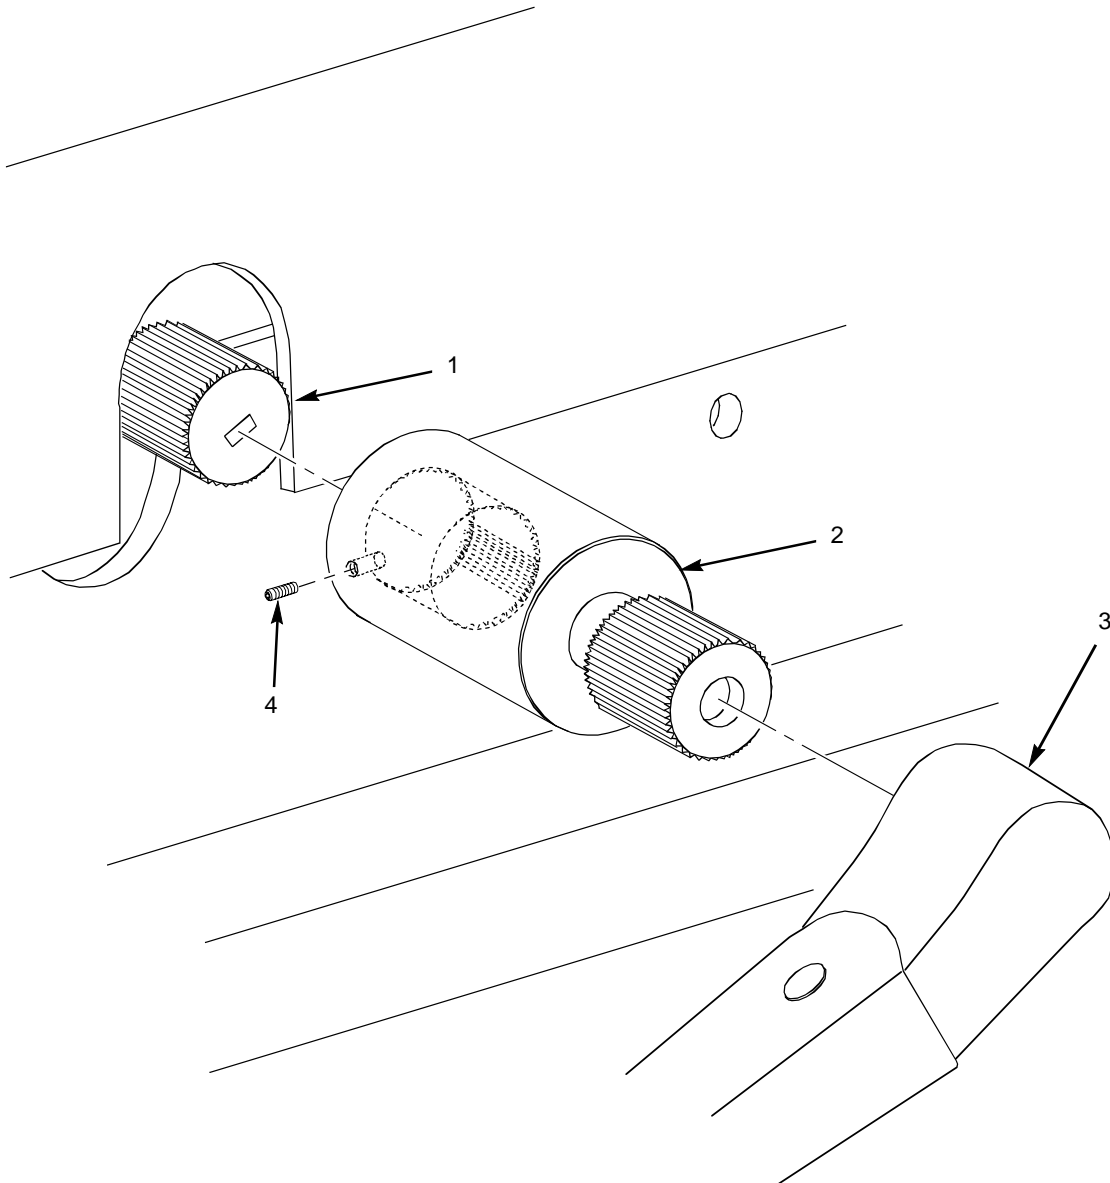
Wiper Arm Extension Installation (2 and 4 Door)
